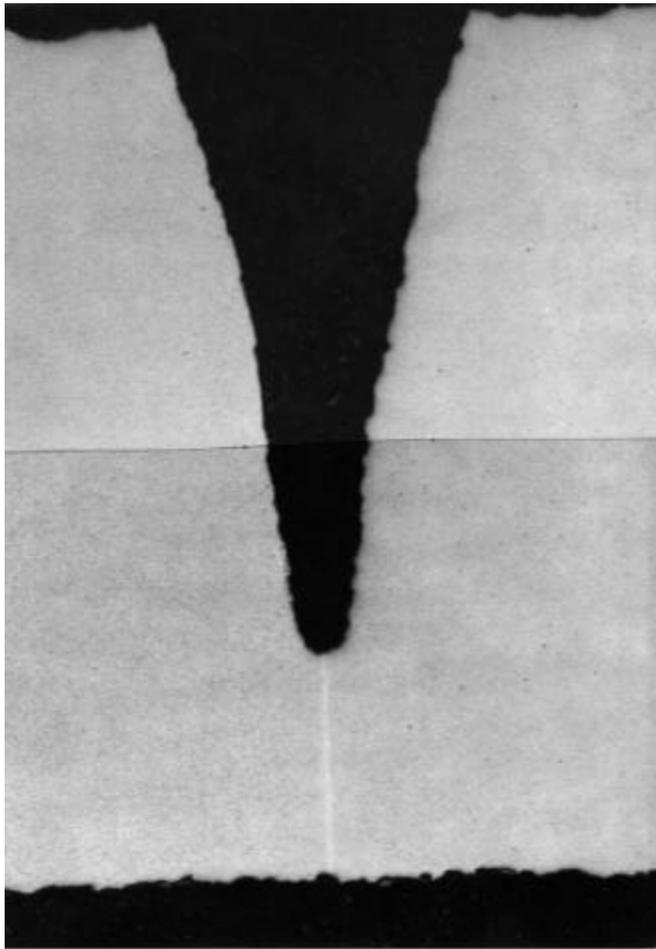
API 5L Gr B 12 inch OD and 0.375 inch WT, produced prior to 1981, which failed due to grooving corrosion of the ERW weld seam
